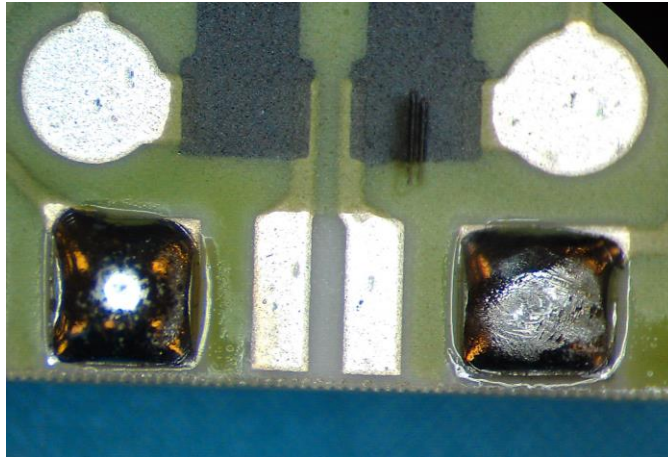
Examples of a Pb-containing solder joint (left) and a typical finished surface of a Pb-free solder joint (right)
